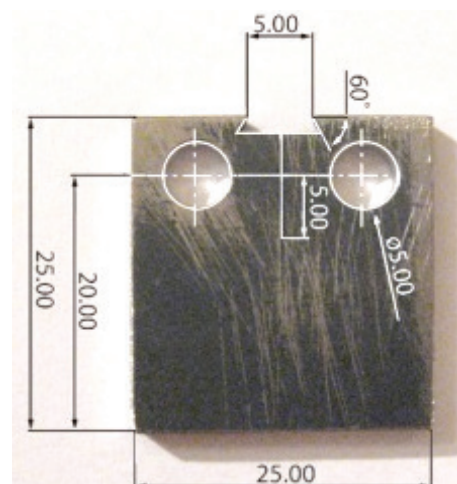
Sizes of the C(T) specimen for fracture mechanics tests.
